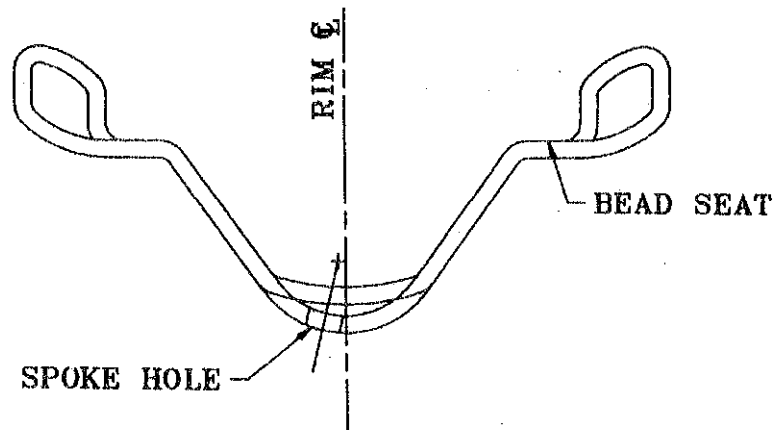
CYLINDRICAL BEAD SEAT RIM FOR MOTOR CYCLES
